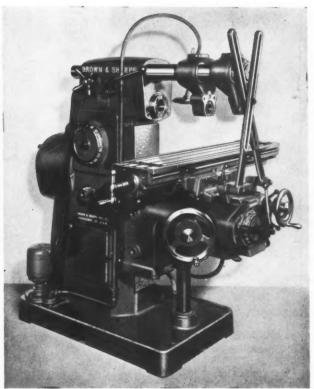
Plain Type Brown & Sharpe Milling Machine with Extended Spindle Face
